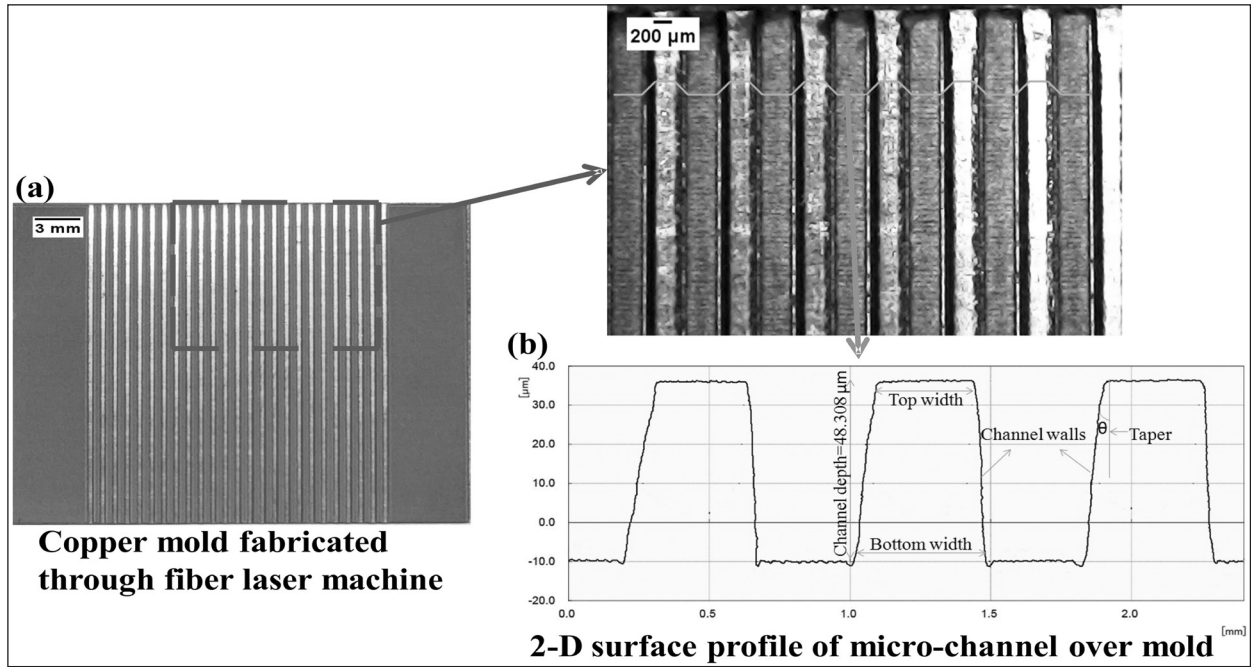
(a) Copper mold fabricated through fiber laser machine, (b) 2-D surface profile of microchannel (Deshmukh et al., 2022).
